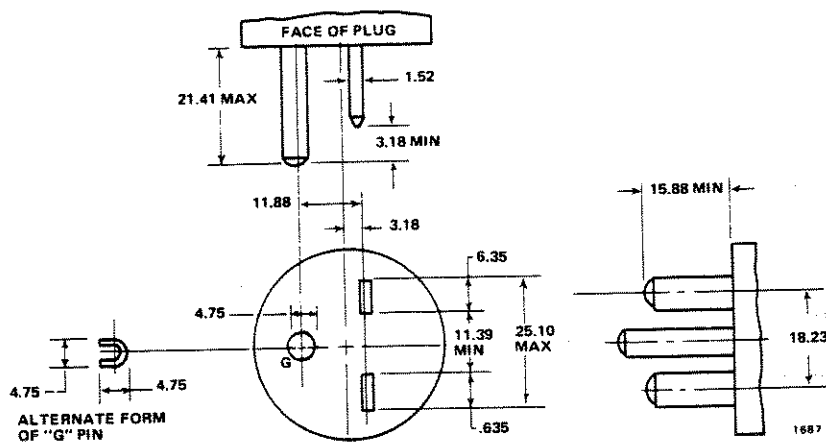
Configuration of 250-V 15-A plug. Dimensions in mm. This is listed as NEMA 6-15P. Use for example Hubbell plug number 5666.
